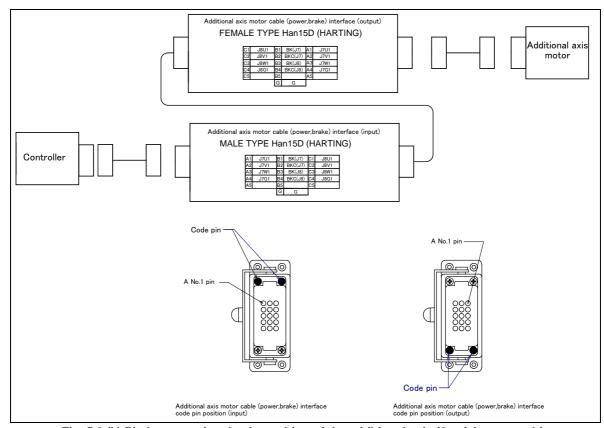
(k) Pin layout and code pin position of the additional axis (2-axis) motor cable (power and brake cables) (ARM) interface and layout position of the code pin (option)
